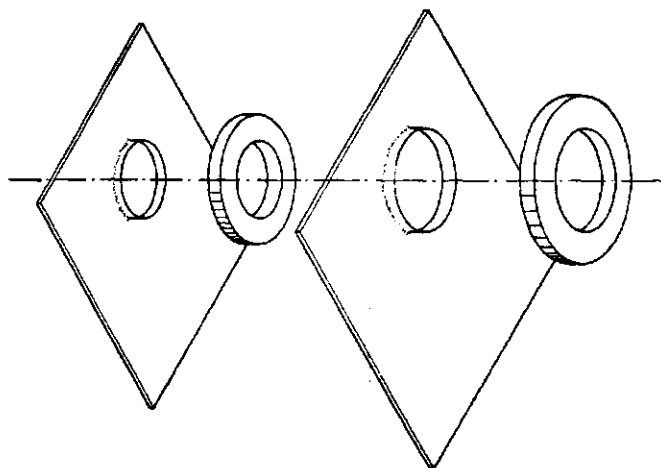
Method of ferrite core assembly for 40 kW h.f. transformer.
